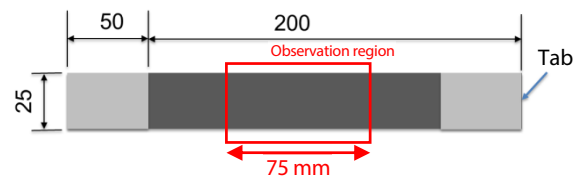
Geometry of Uniaxial Tensile Test Specimen for X-ray CT Imaging
